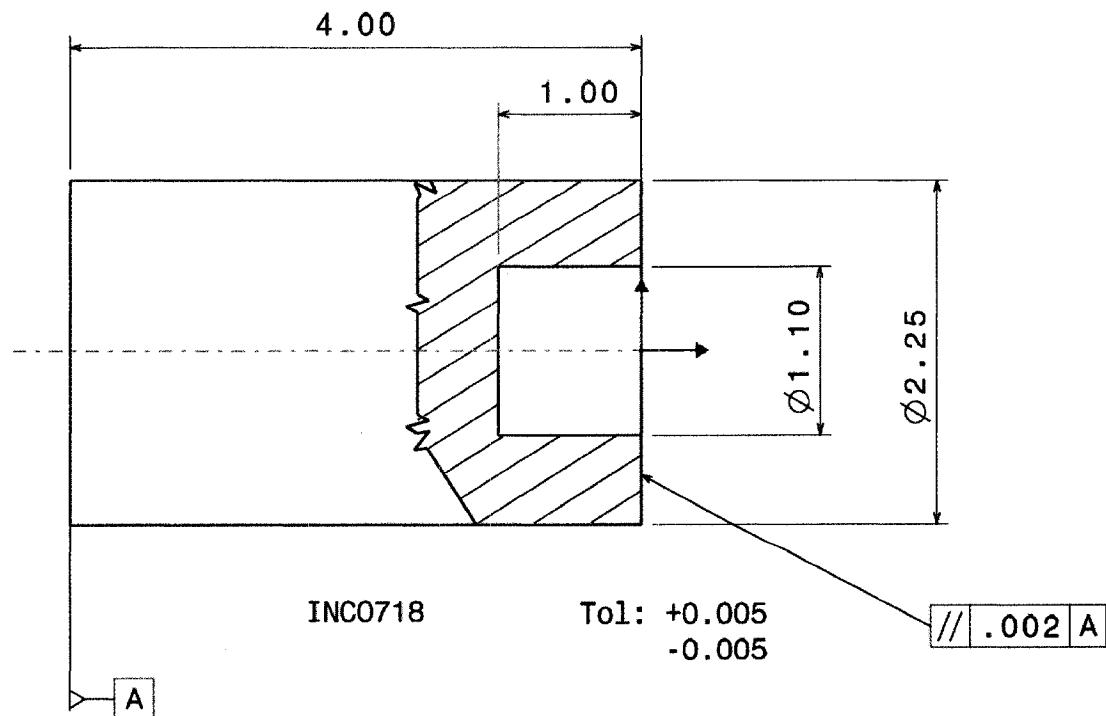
Inconel 718 test piece configuration for friction welding
